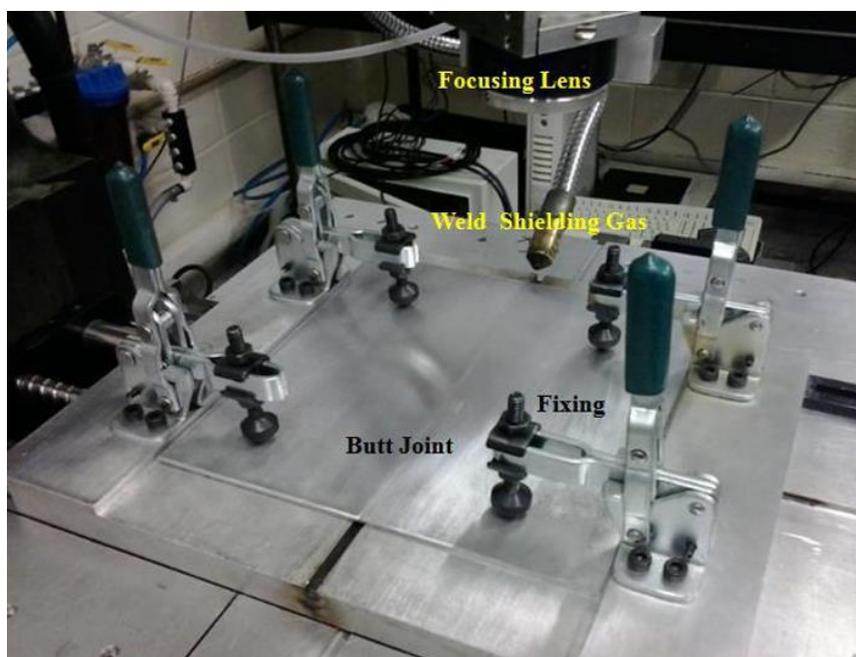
System for fixing plates for carrying out the butt welding
